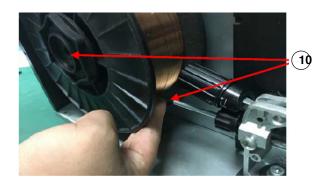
Inserting of the wire for the MIG welding process
